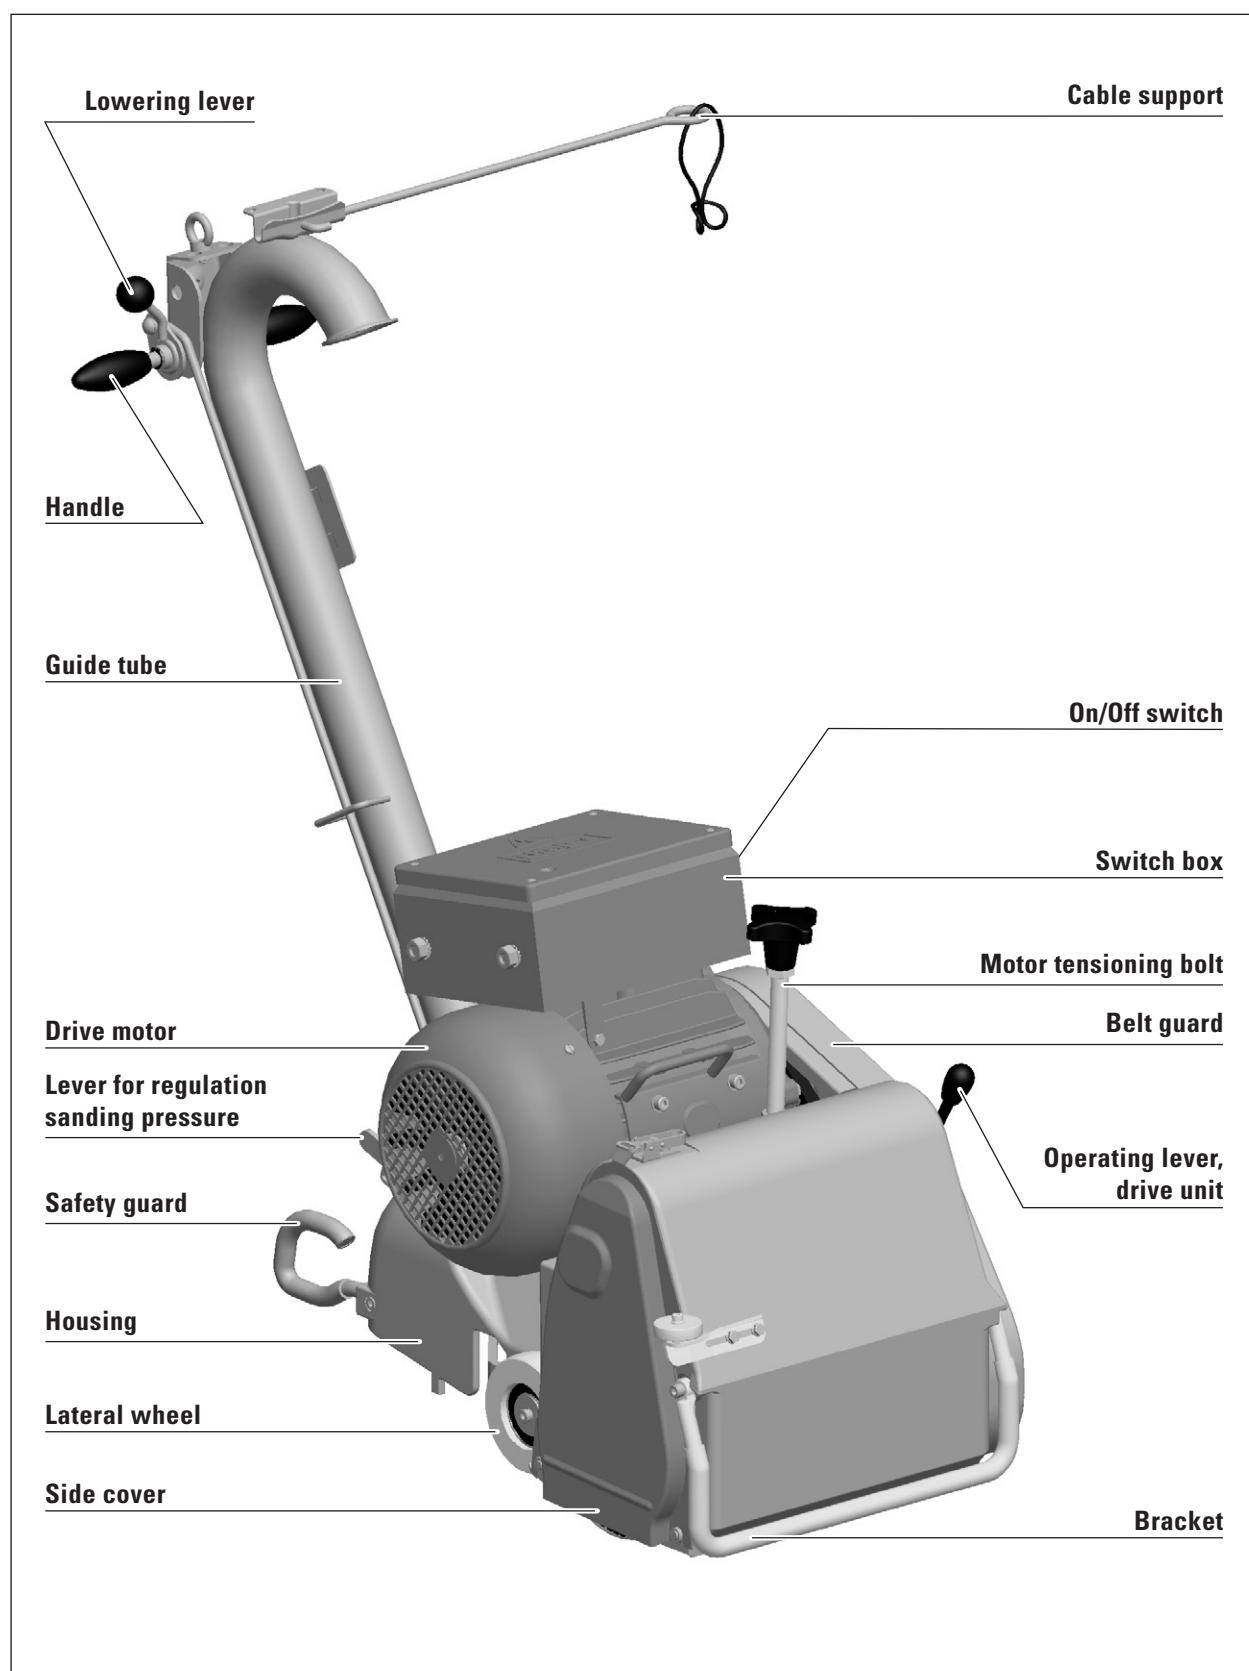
Assemblies of the belt sander machine SUPERHUMMEL
